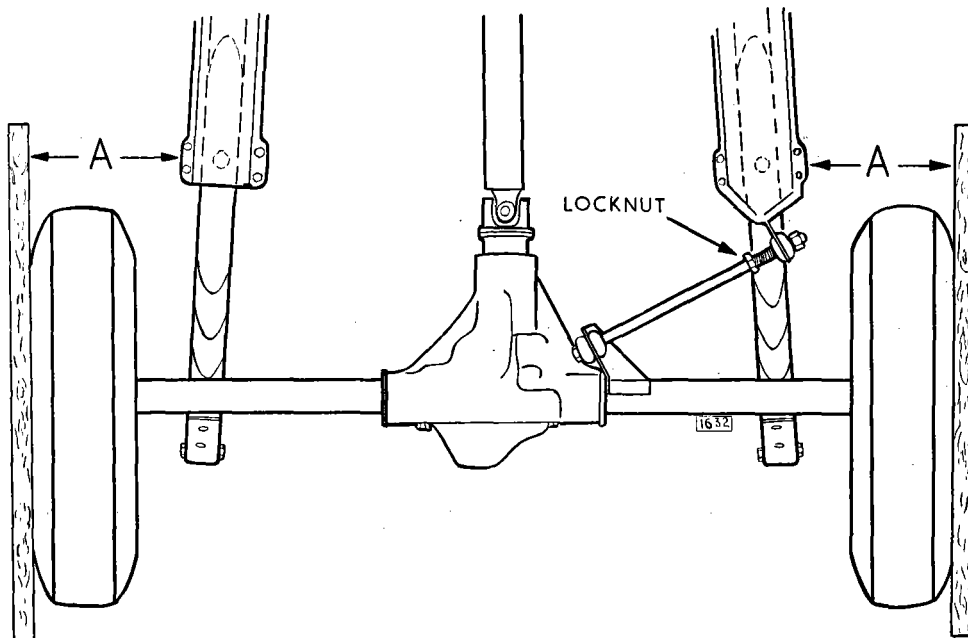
Panhard rod adjustment. Dimension "A" must be the same at both sides.
